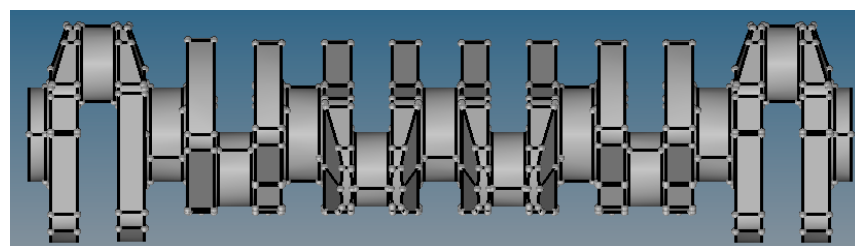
The structure feature of the six-cylinder engine crankshaft.
